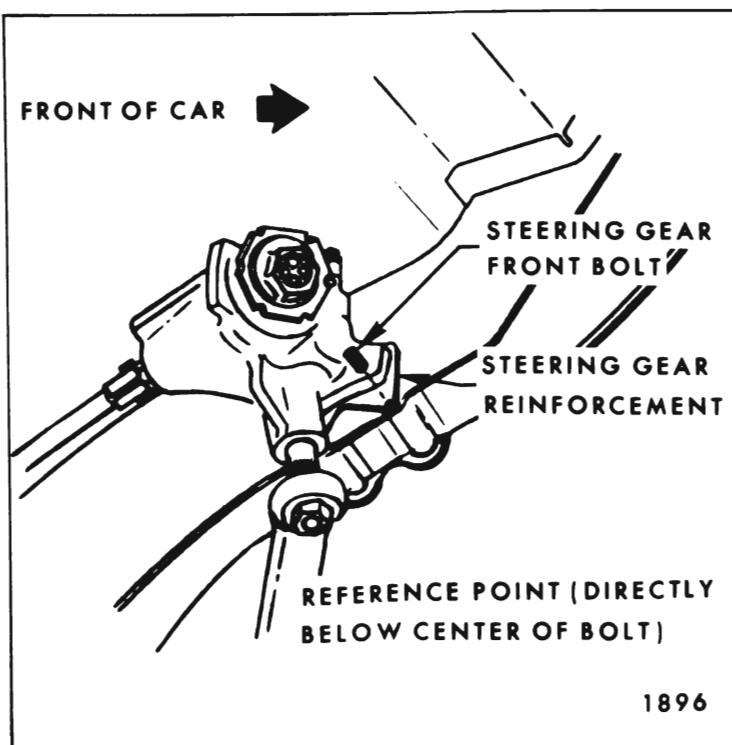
Ref. Point at Steering Gear Reinforcement
